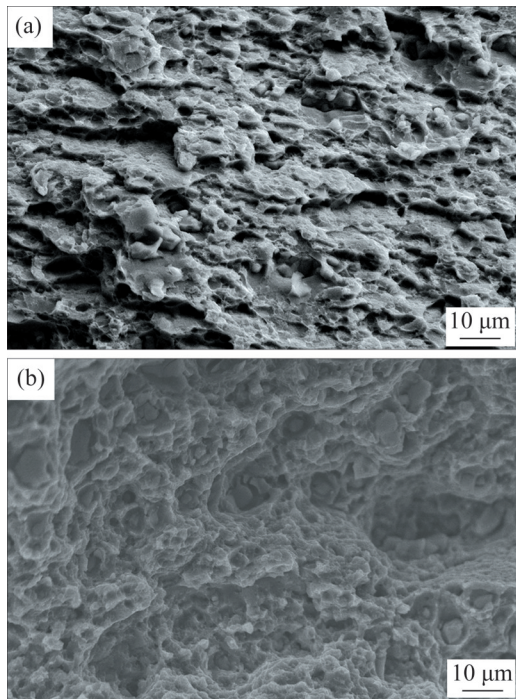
Fracture surfaces (a) before and (b) after friction stir welding of powder metallurgy AA2024 alloy
